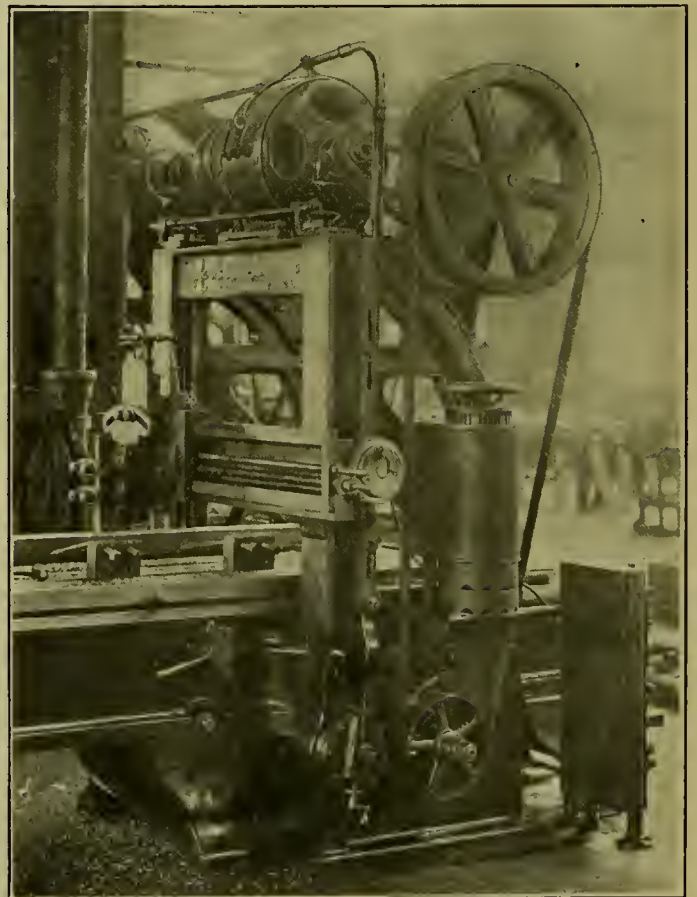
THE CHAIN DRIVE UPON THE 30-IN. POWELL PLANER, SHOWING CONVENIENT ARRANGEMENT OF CONTROLLER.—
